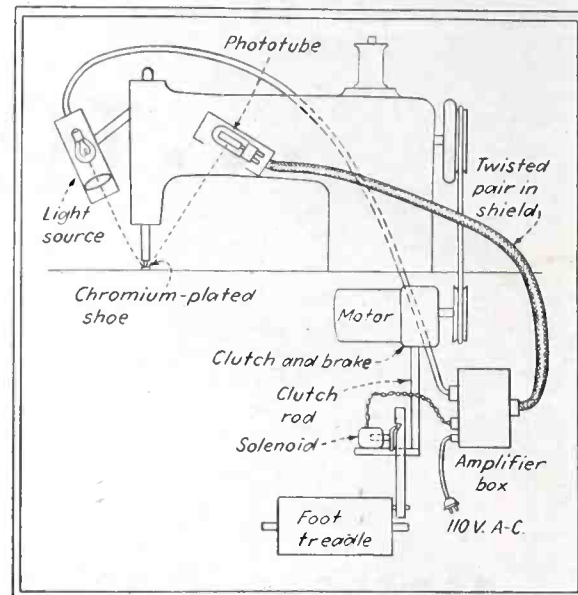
Basic arrangement used to make a sewing machine safe for sightless operators
